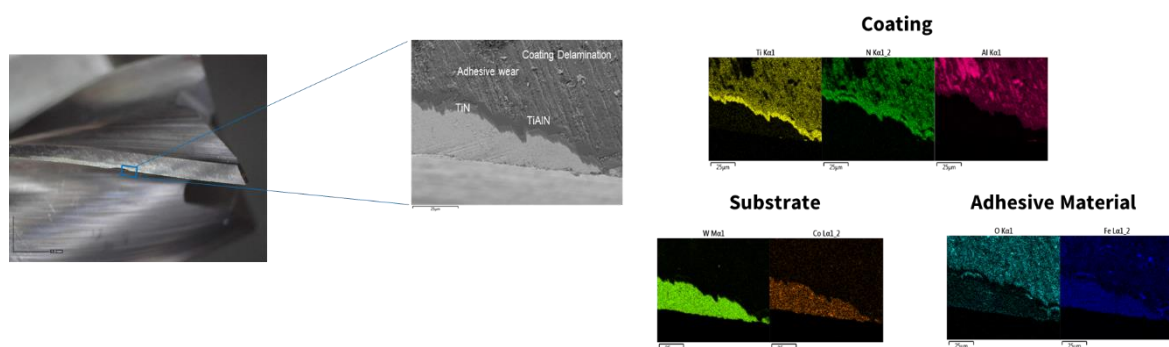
EDS elemental distribution maps of coated carbide end mill after 15 passes on a CK45 machined workpiece.
